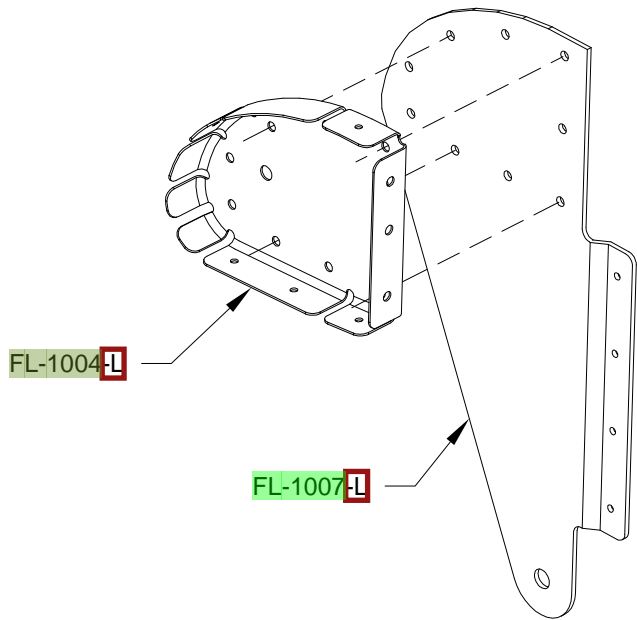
LEFT HINGE PAIR RIB SUBASSEMBLY
